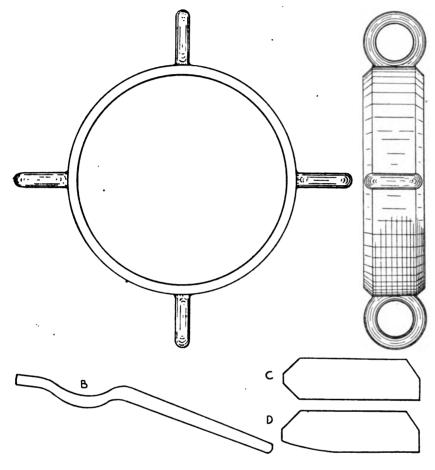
THE EYES ARE WORKED OUT WITH EYE-BOLT TOOLS.
